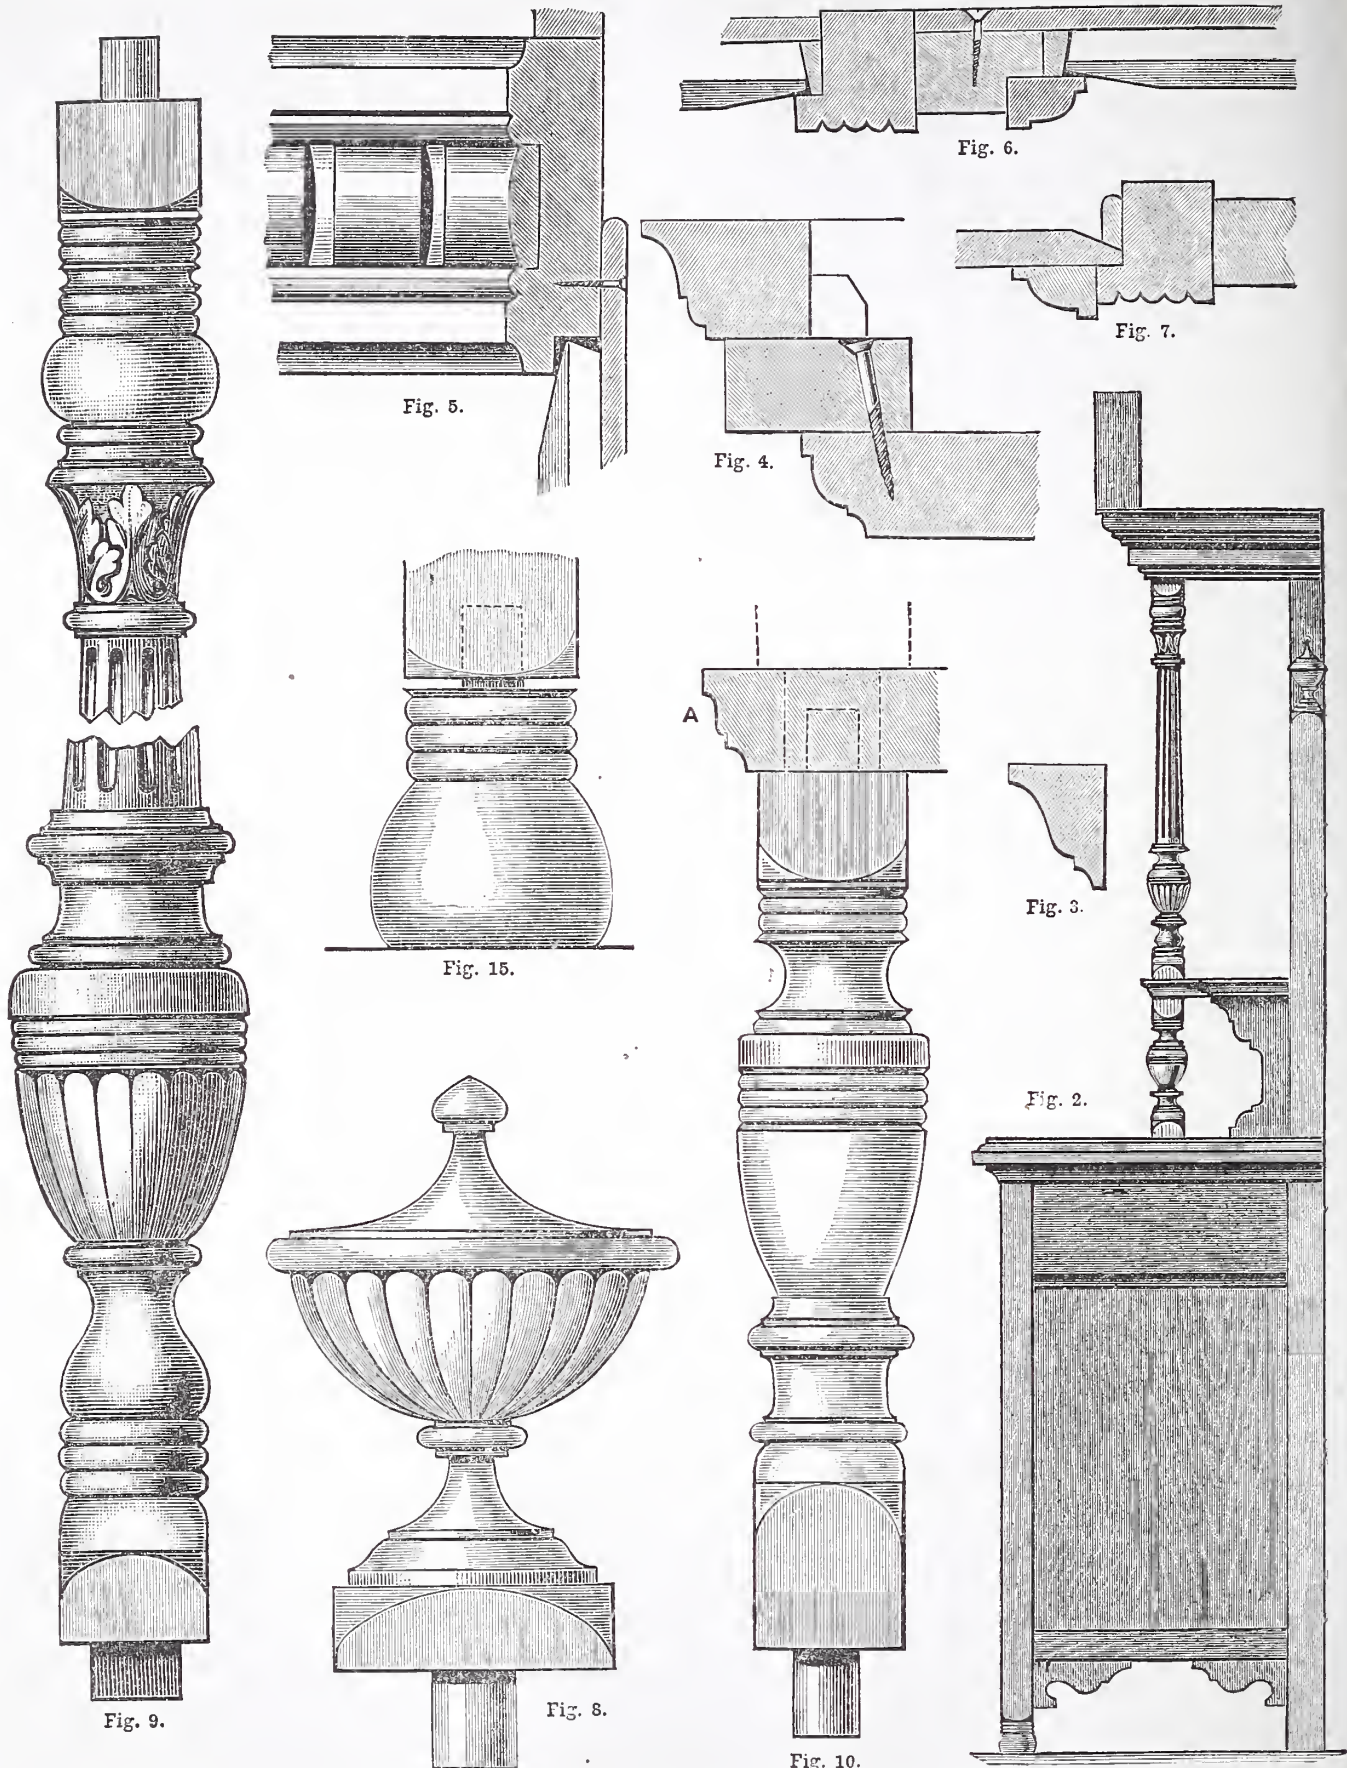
End Elevation of Small Sideboard: Scale, one-twelfth size, or 1 inch to 1 foot. Fig. 3.—Section of Moulding used in Pediment. Fig. 4.—Section of Cornice. Fig. 5.—Rail above Side Glasses in Elevation and Section. Fig. 6.—Section of one of Centre Posts, etc. Fig. 7.—Section of Post and Side Panel under Shelf, with Planted Moulding. Fig. 8.—Turned Finial in Centre of Pediment, and Pattern for Turned Knobs above End Posts. Fig. 9.—Turned Pillar supporting Roof and resting on Shelf. Fig. 10.—Turned Pillar supporting Shelf—A, Moulding of Shelf. Fig. 15.—Turned Foot for Cupboard.
